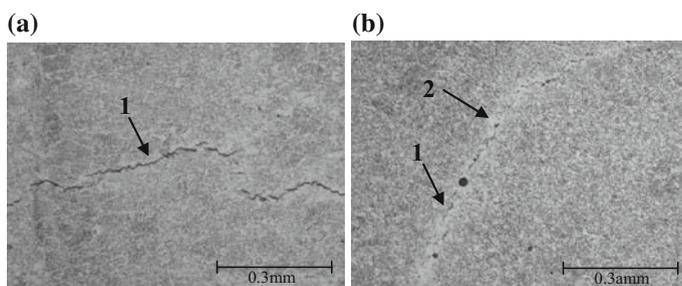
Replica images: the weld between the flange and the shell (HAZ), inside (see Fig. H.1): a surface; b after grinding 3 mm of the surface. *1*—cracks; *2*—characteristic structure of decarburization
